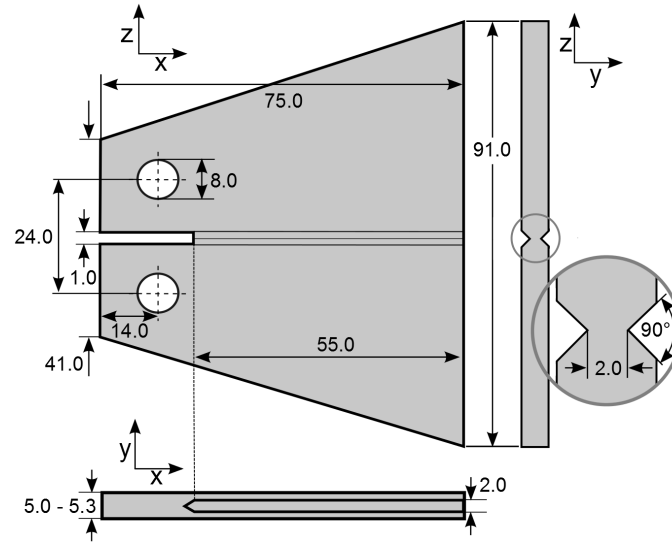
Geometry and dimensions of TDCB specimen used for mode I fracture tests of polymers.
